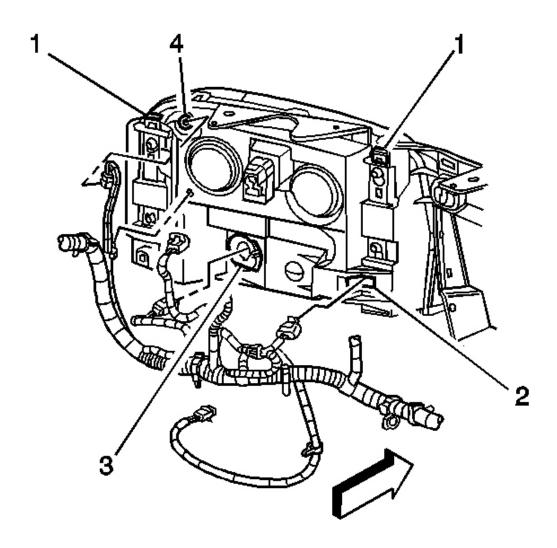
Locating Headlamp Components (TrailBlazer) Courtesy of GENERAL MOTORS CORP.
